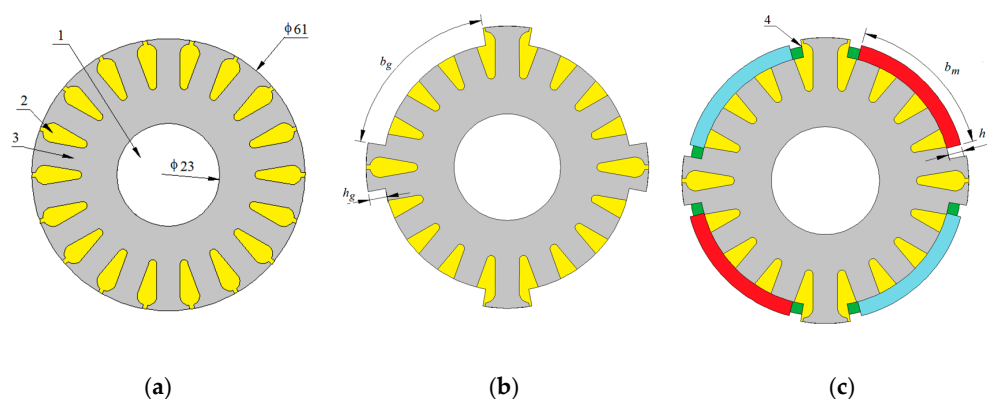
Structure of the rotor: (a) rotor from an induction motor; (b) rotor with milled gaps; (c) rotor with mounted permanent magnets (1—shaft, 2—rotor core, 3—aluminum bars, 4—non-magnetic wedge).
